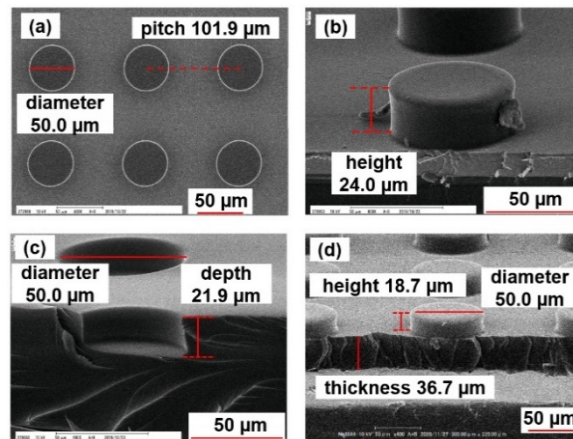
SEM images of master mold, replica mold and micropillar pattern on MEXFLON. (a) Top view of master mold. (b) Tilted angle view of master mold. (c) Cross-sectional view of replica mold. (d) Cross-sectional view of micropillar pattern on MEXFLON.
